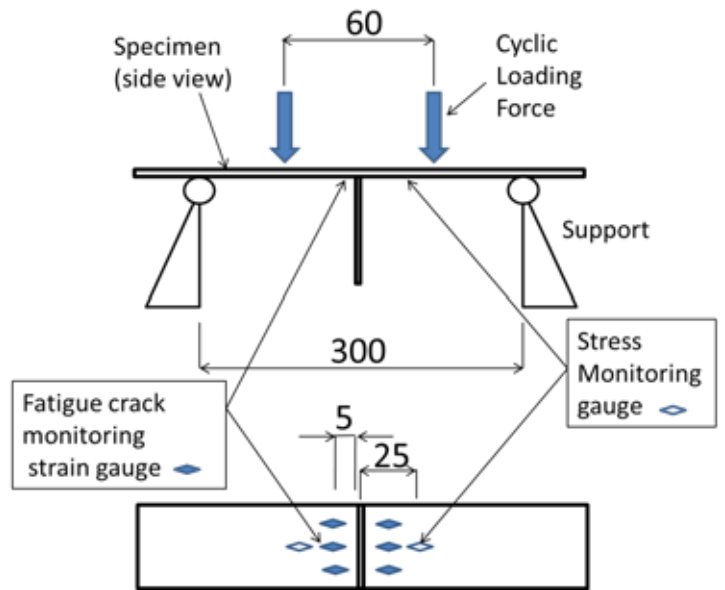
four points bending fatigue test method of Laser arc hybrid fillet welded joint
